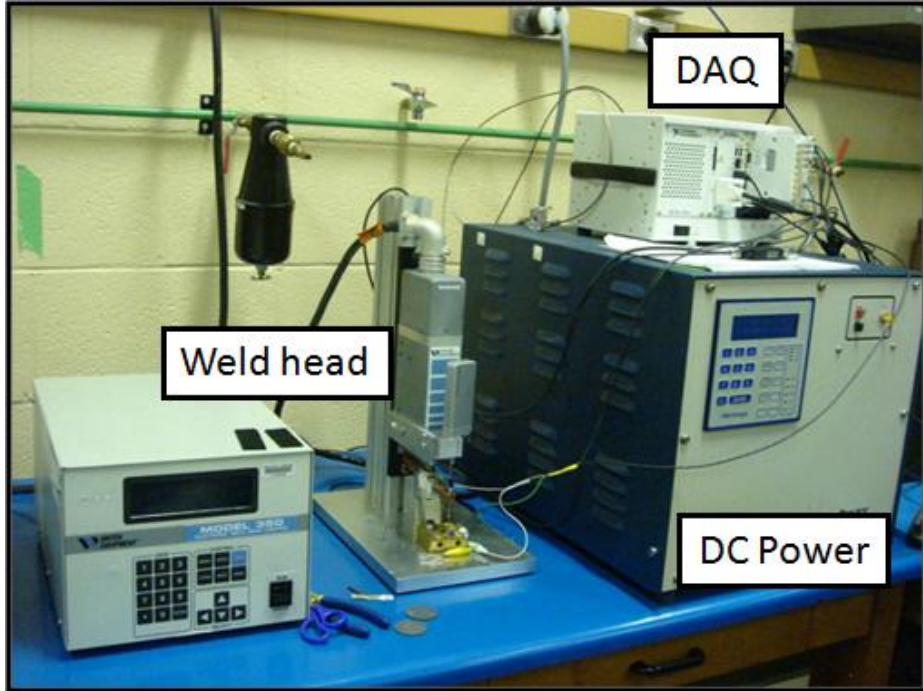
Micro-resistance spot welding machine setup
